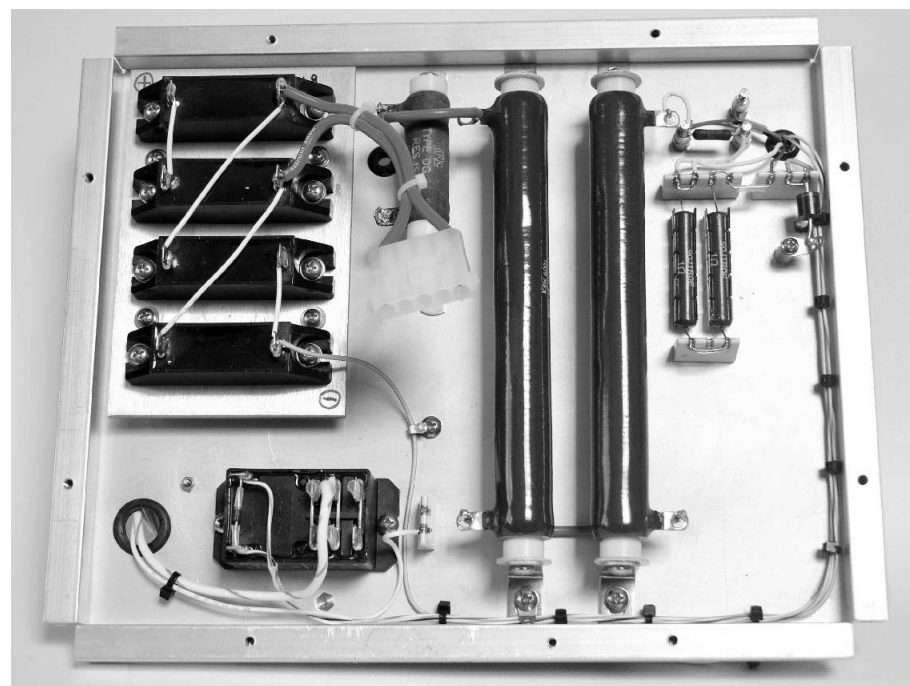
The bleeder resistors, metering components and HV/LV-select relay mount on the rear of the subpanel. PTFE spacers insulate the bleeder resistors from the chassis, while the HV diode blocks are heat sunk to a 1/8 inch aluminum plate.
